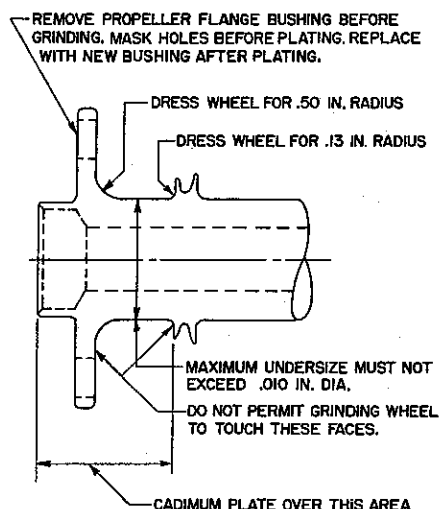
Reconditioning Crankshaft Oil Seal Surface
